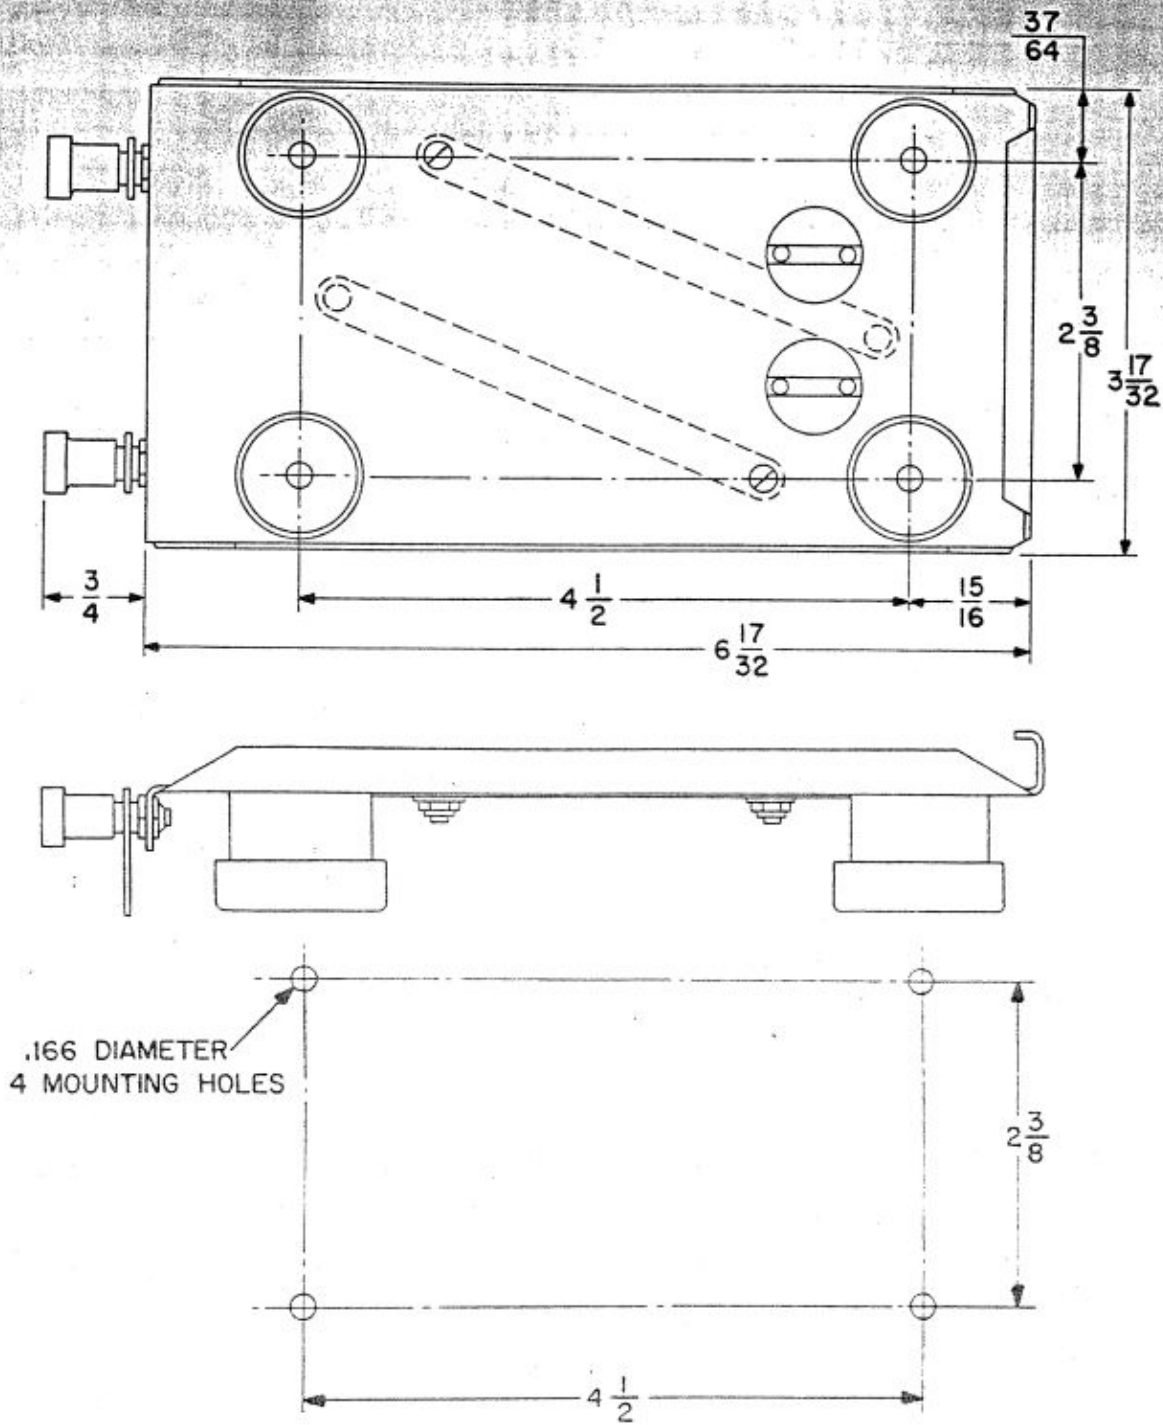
ARC Type P-14A Power Unit with ARC Type M-28A Mounting, Outline Dimensions
